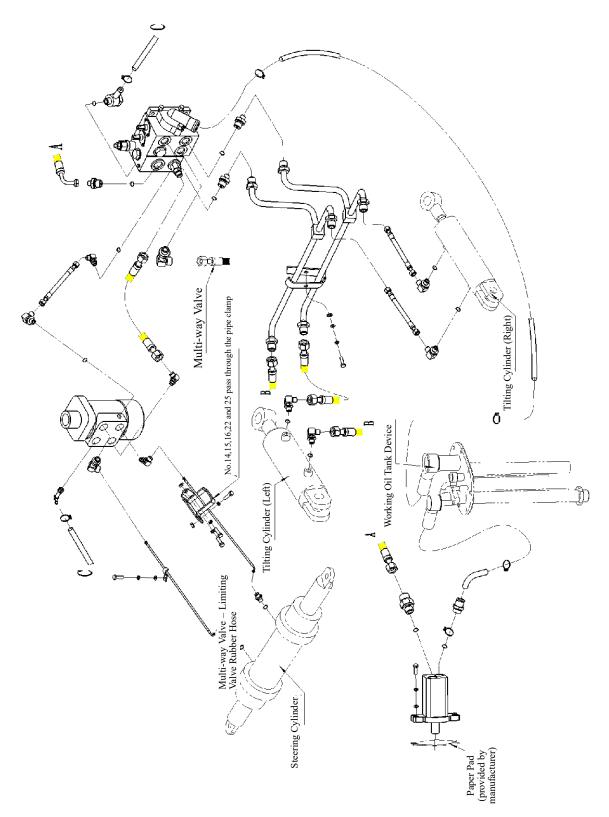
Schematic Drawing of Hydraulic Pipeline (Diesel and Gasoline Forklift Trucks)
